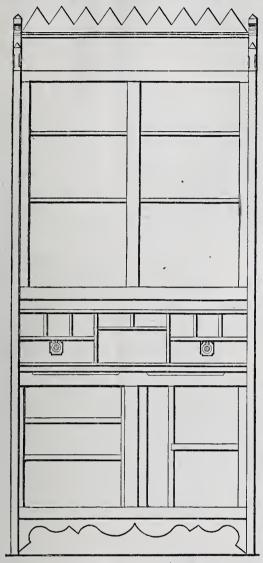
and 3.-Front and End Elevations.-Scale, 34 Inch to the Foot.
